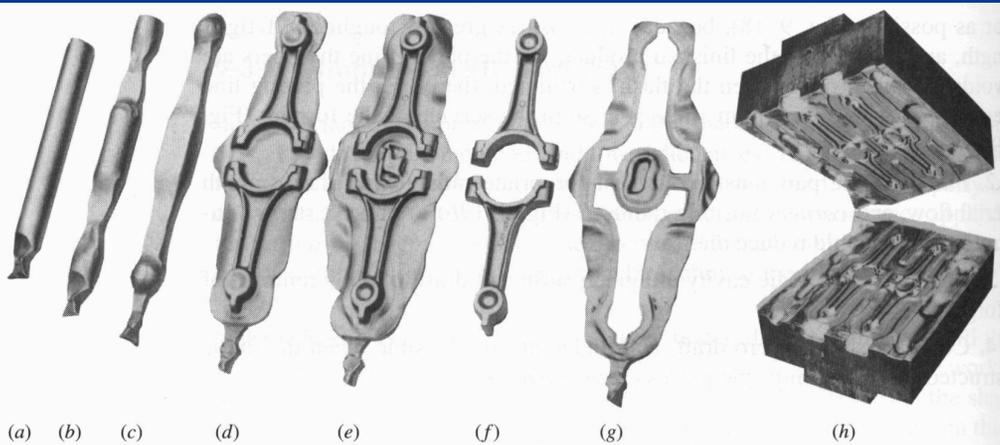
Hammer forging two connecting rods: (a) bar stock; after (b) fullering, (c) "rolling," (d) blocking, (e) finishing, (f) trimming; (g) the flash; and (h) the forging dies. (Courtesy Forging Industry Association, Cleveland, Ohio.)
